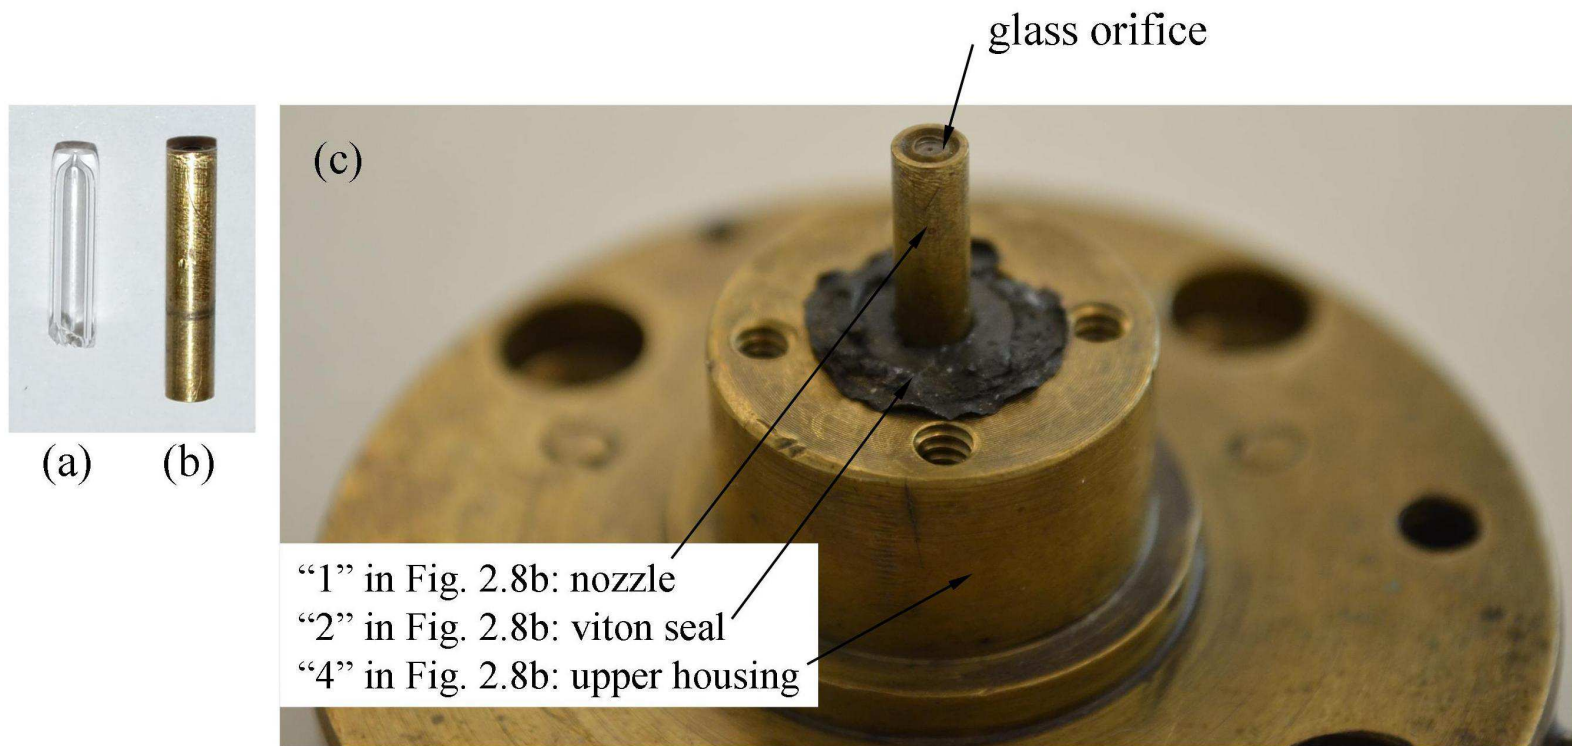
(a) Glass nozzle (with a fractured bottom); (b) brass nozzle used in this study; (c) assembly of component "1": nozzle, "2" viton seal, and "4": upper housing from Fig. 2.8b without the cap "3".
